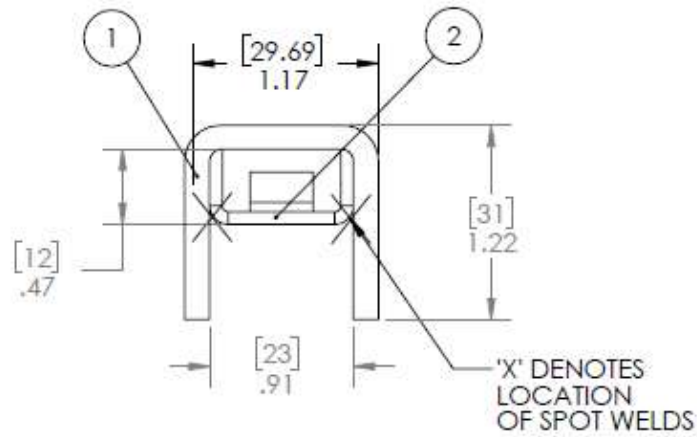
TOP AND BOTTOM RAIL ASSEMBLY
